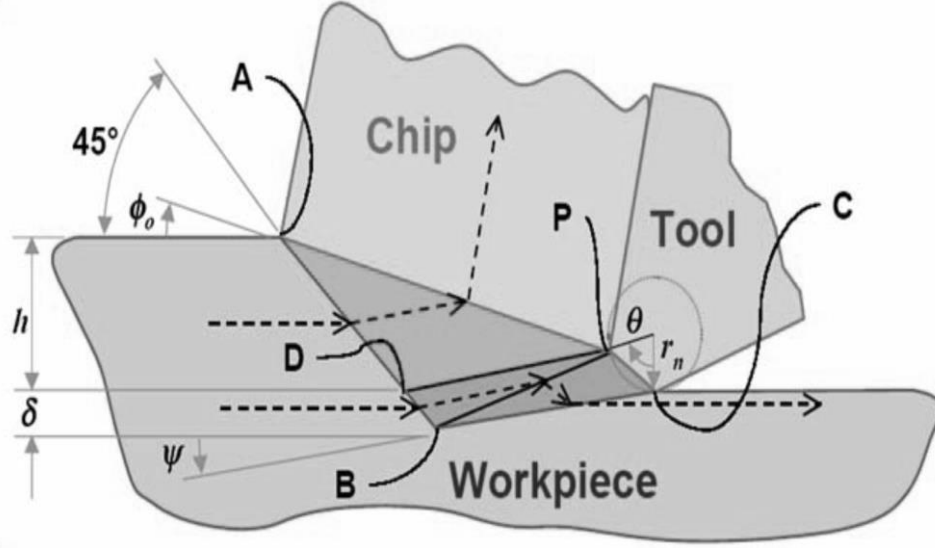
Geometric model of the cutting process with an edge radius tool [58]
